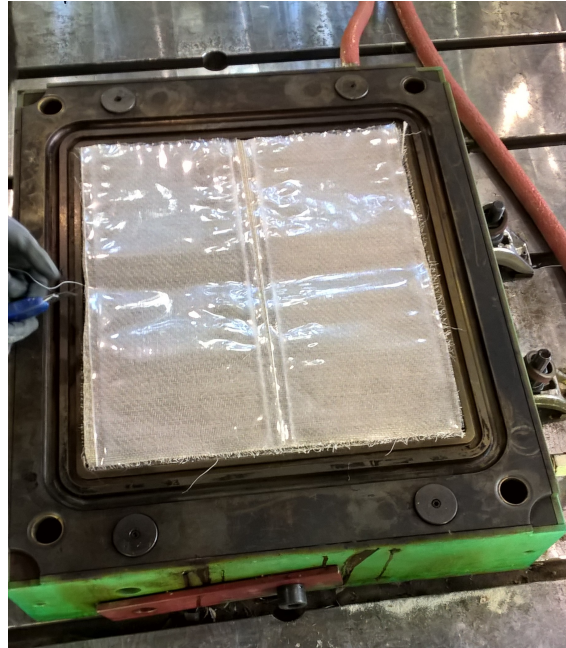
Stacking is put into the die then the hot moulding cycle is applied. The inner die dimensions are 460 mm \times 500 mm.
